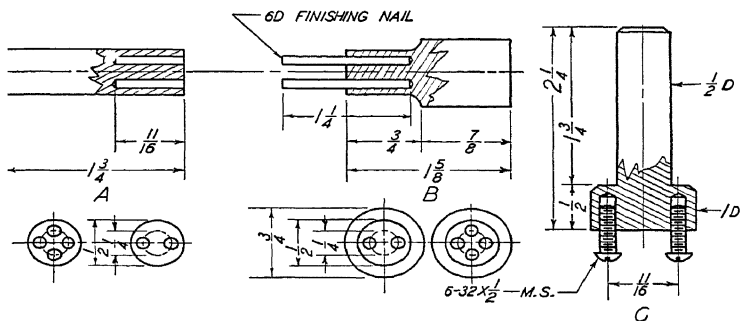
Arbors: (a) Drill chuck arbor, (b) Tail-stock arbor, (c) Slide or buckle arbor.
